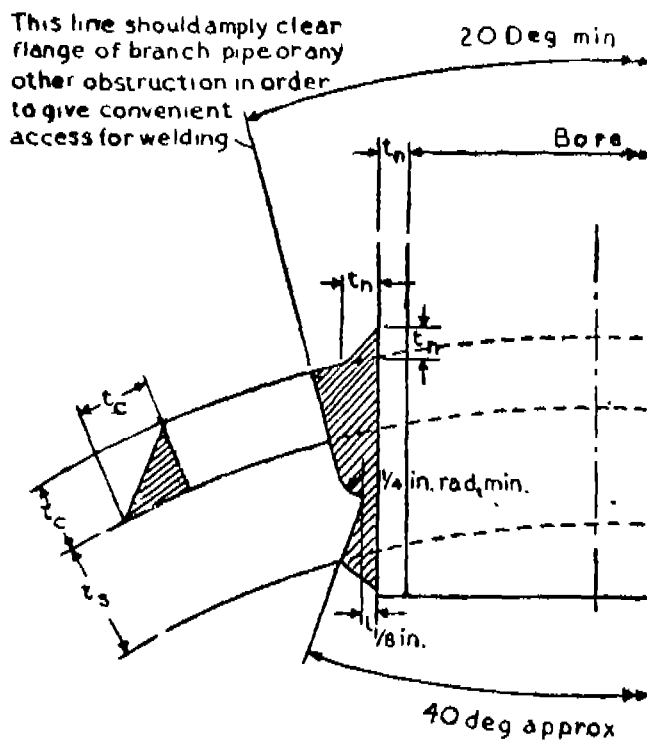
C. Welded-in standpipe or branch with compensating ring
